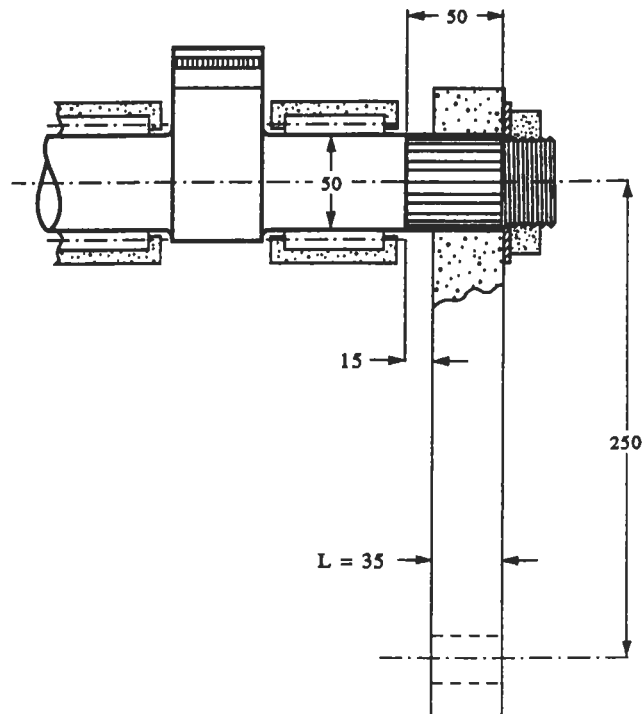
Side view of the steering shaft. Dimensions in mm.
